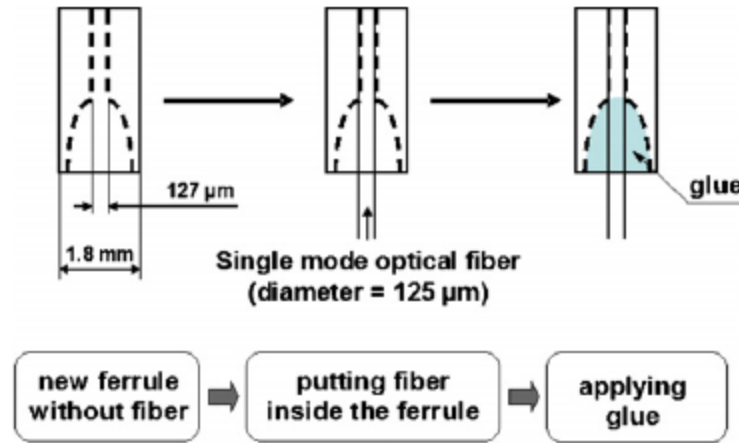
Fabrication process of ferruled fibre cantilever ([2.50]).
